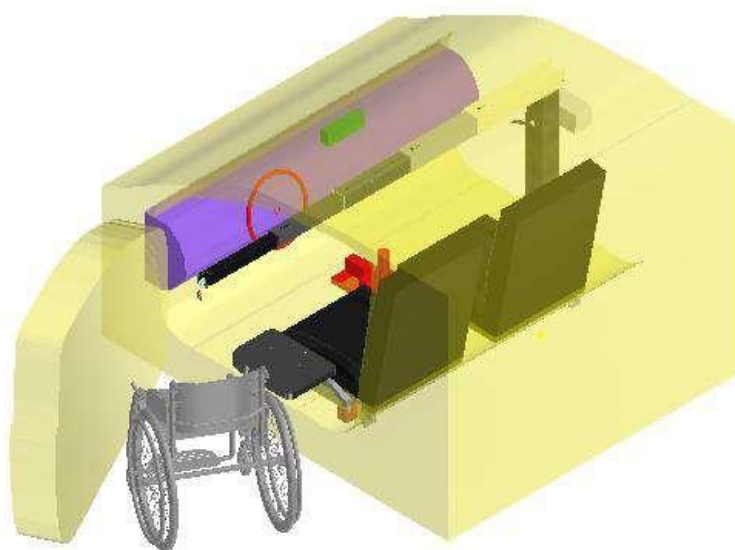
Demonstration of the wheelchair setting after the user approaches the car from the driver's side
